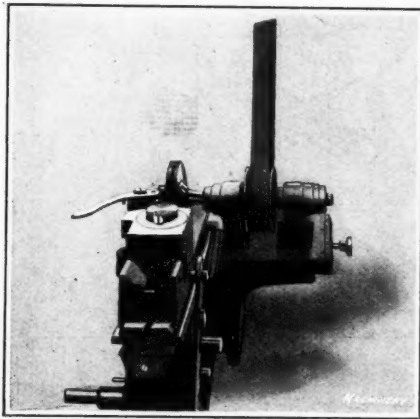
Hand Milling Machine and Straddle Cutters for slabbing Sides of Setting Pin
